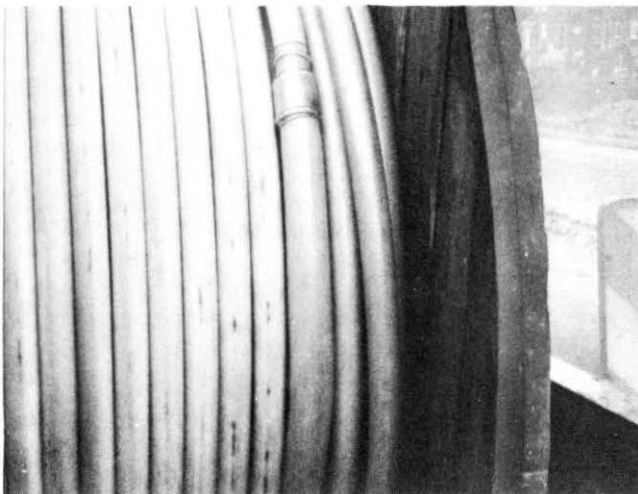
Diversion cable on drum, showing weld at one end of the unidiameter joint
